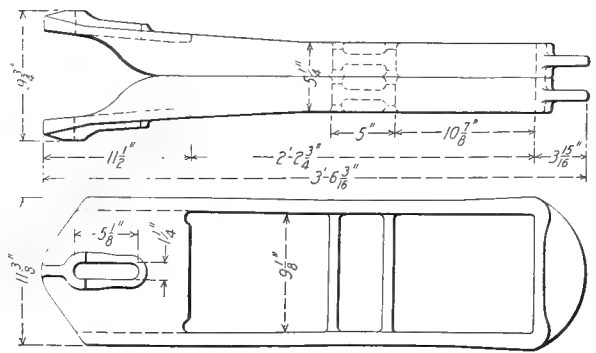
B—Miner Two-Part Cast Steel Yoke for Tandem Gear Arranged for Key Connection to Coupler. W. H. Miner.
